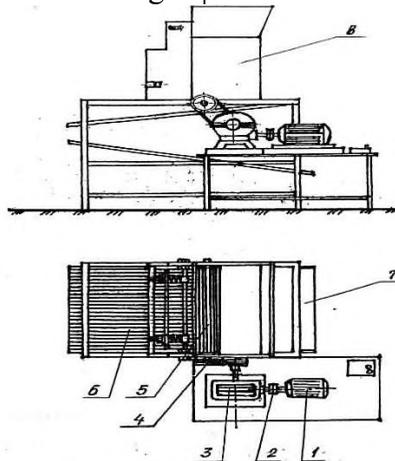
Experimental device that separates the hazelnut kernel from the shell: 1-electric engine; 2-coupling; 3-infinite screw gearbox; 4-belt drive; 5-drum that breaks the nut shell; 6-chain; 7-board that removes the shell, 8-hopper with the nut shell.
